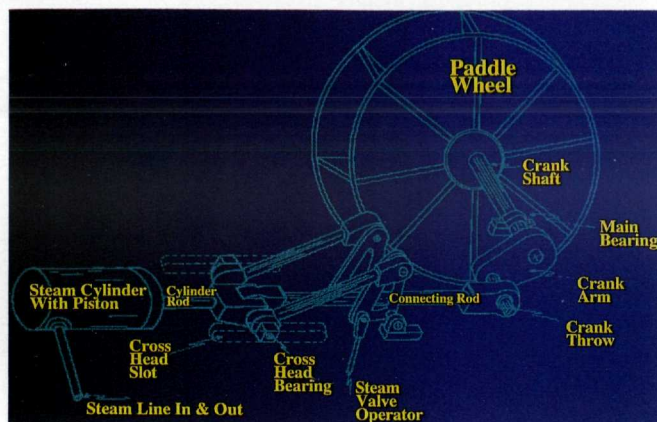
Generalized drawing of the engineworks on board the SS *Central America*. The Morgan Iron Works-built machinery weighed 750 tons and included two inclined steam engines each with a 165-cm diameter cylinder and a 3-m stroke. Port and starboard paddle wheels, each 10 m in diameter, drove the vessel at a cruising speed of 11 knots. Drawing courtesy of Donald J. Hackman.
